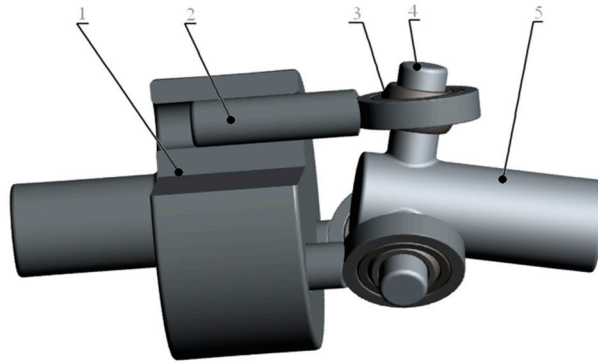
Tripod universal joint assembly 1-input shaft, 2- slide-rod, 3-joint bearing, 4-tripod arm, 5- tripod.
